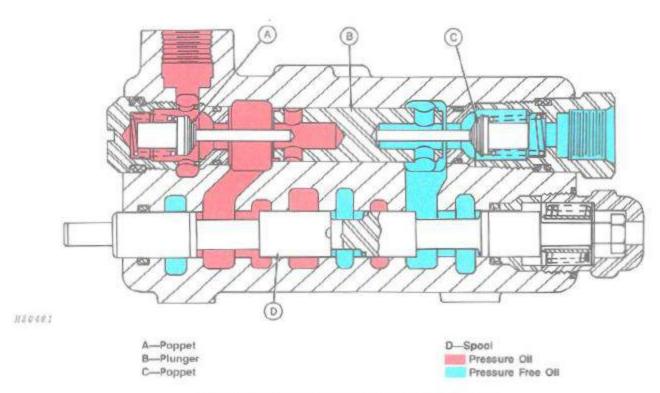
Cross-Section Unloading Auger Swing Control Valve (Transport Position)
